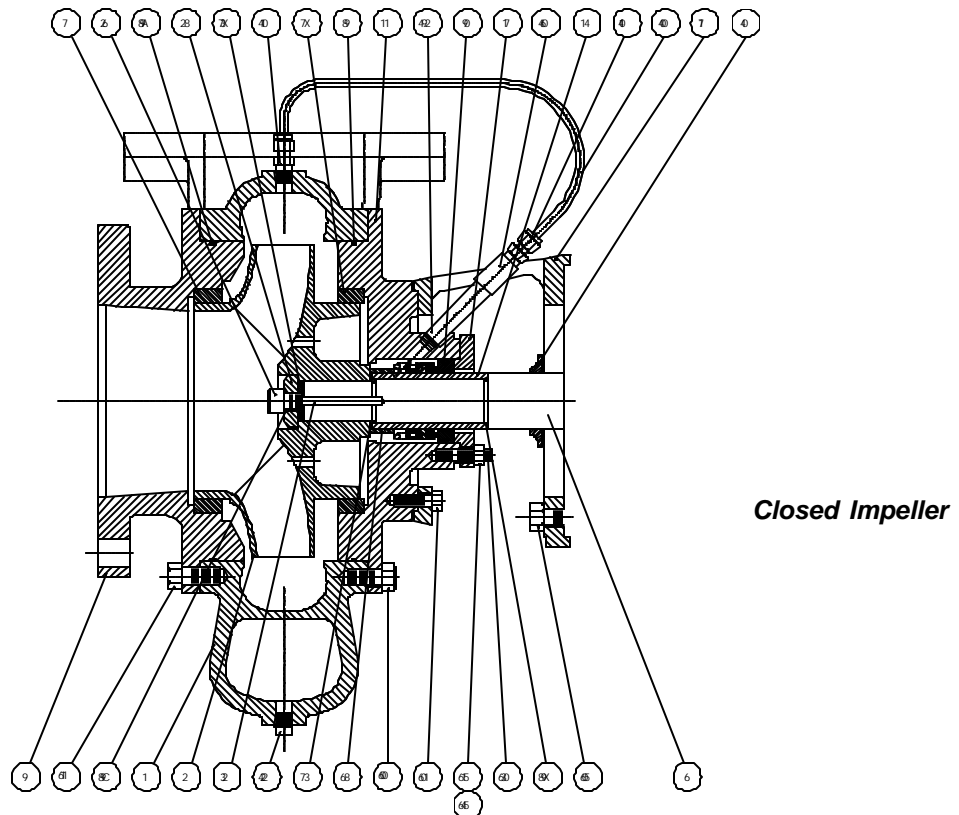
Sectional Drawings for Close-Coupled GH Pump
